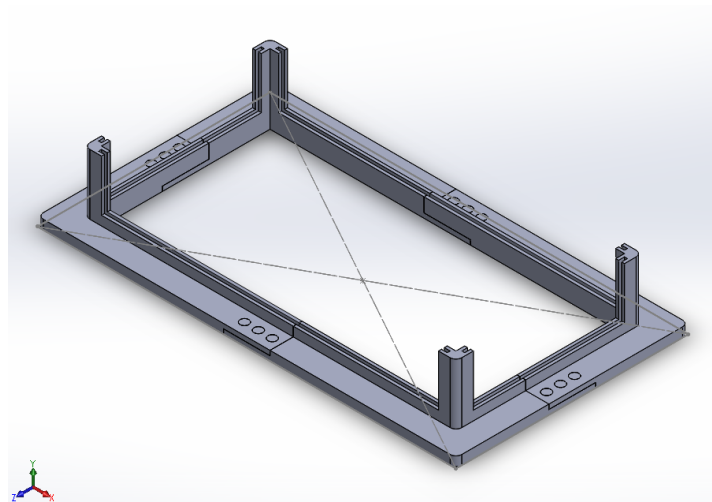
The fifth generation DCC showing the four parts that lock together to make the larger top piece.
